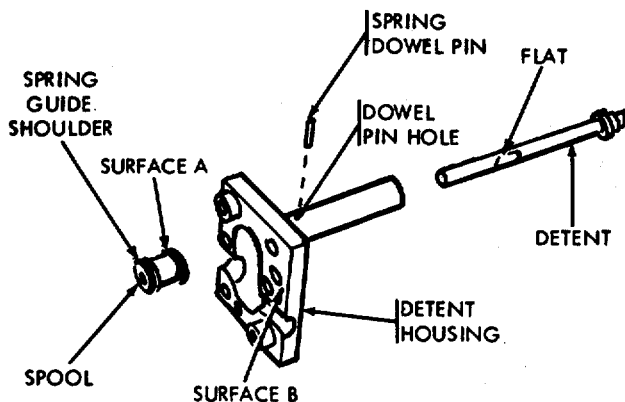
Removal/installation ammunition detent assembly (late design--type II).
